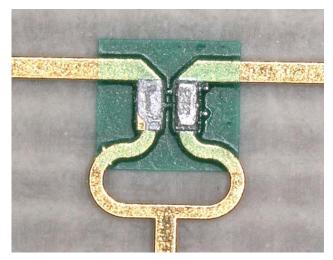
Solder shorts between the pads of the Wilkinson combiner/divider pads.
